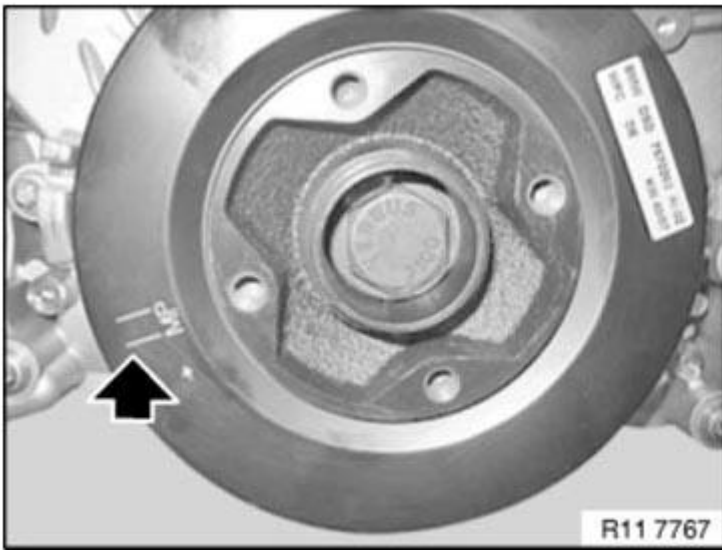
Identifying Mounting Position Of Special Tool 11 8 570
